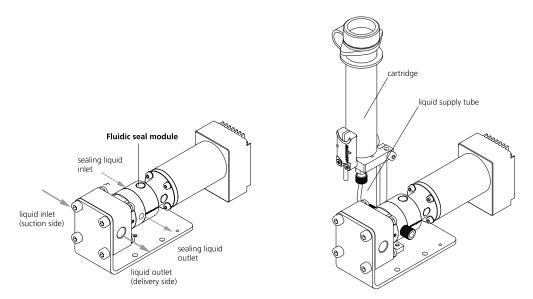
Design of the micro annular gear pump with fluidic seal module (figure with mzr-7245 S +S) (layout on the right: with the optional sealing liquid delivery set)
